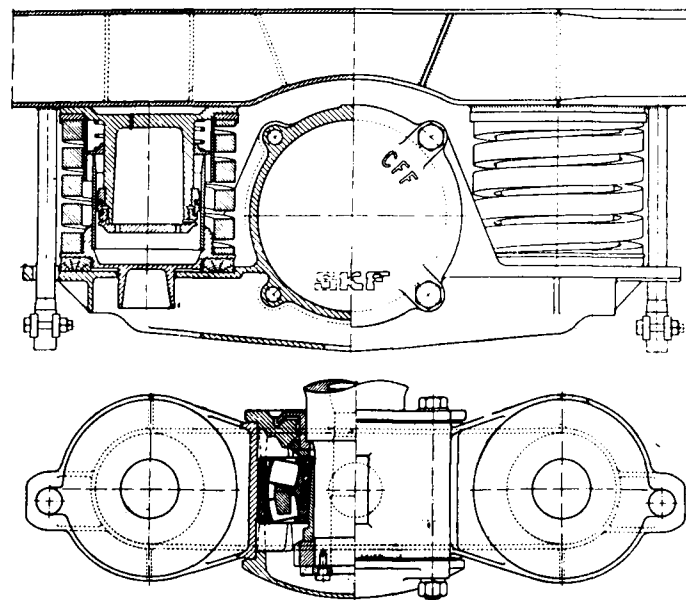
Bearing scheme of Swiss Schlieren bogie. The axlebox is fitted with one spherical roller bearing.
